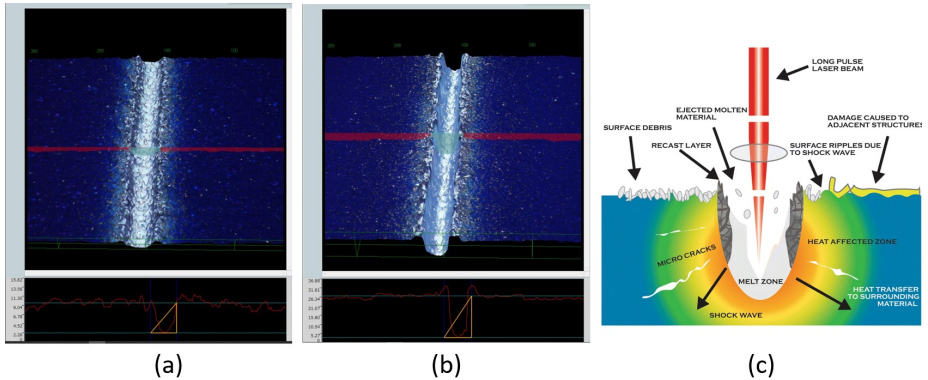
Damages caused by laser scribing. (a) A single laser scribe, cut depth 7 μm ; (b) Three times of laser scribes, cut depth 21 μm ; (c) Different types of damages caused by laser, courtesy of Clark-MXR, Inc [140]
